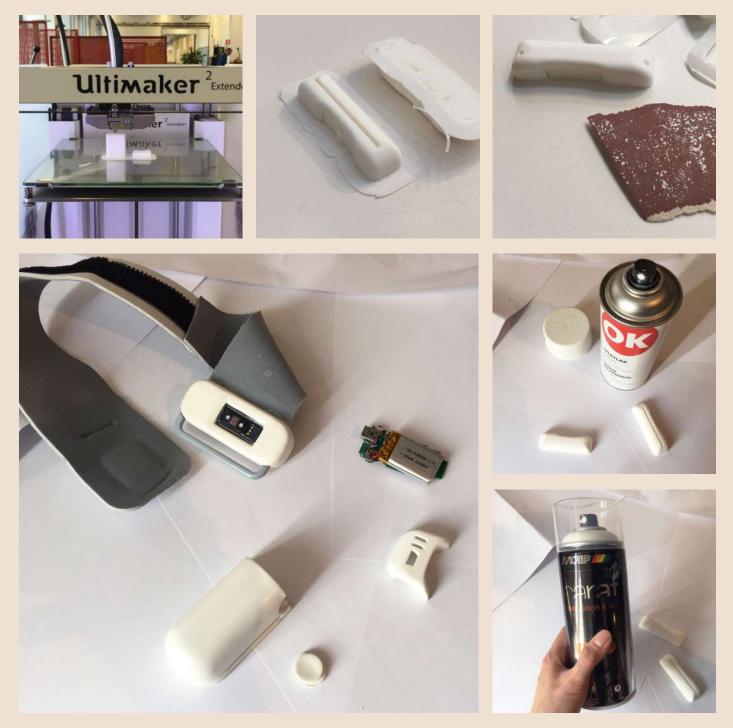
(clockwise from top leftt)3D printing process, 3D printed parts, sanding process, sparying primer, spraying paint, printed parts
